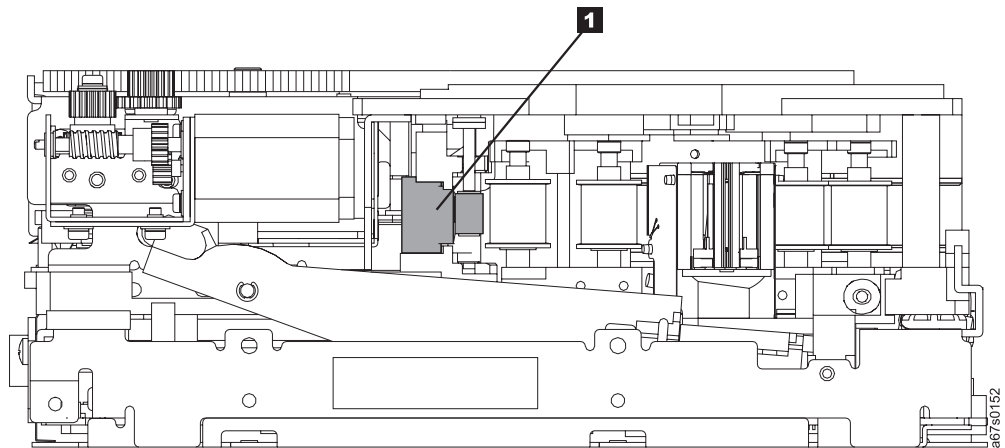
Rotating the loader motor gear so that the leader block retracts. The drive is shown on its side. The head is on the right and the arm of the head brush at the bottom of the figure.
